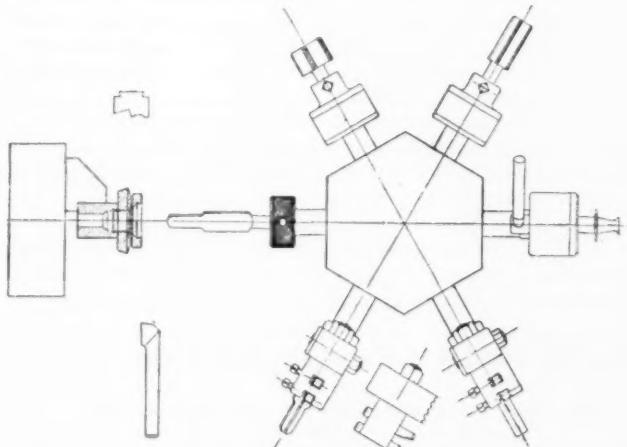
TOOL LAYOUT FOR MAKING ALUMINUM TIME-FUSE BODY ON UNGEARED CAPSTAN LATHE
